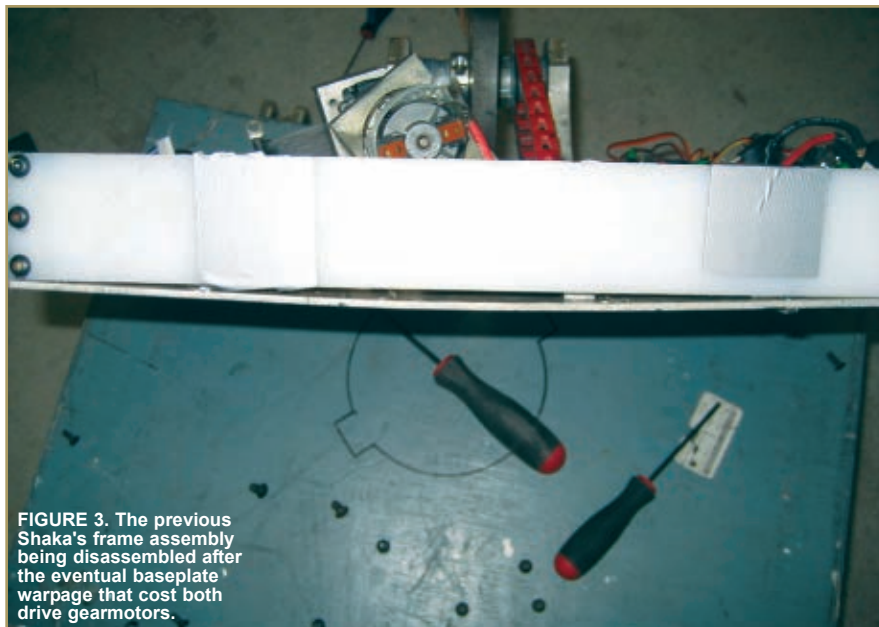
The previous Shaka's frame assembly being disassembled after the eventual baseplate warpage that cost both drive gearmotors.
